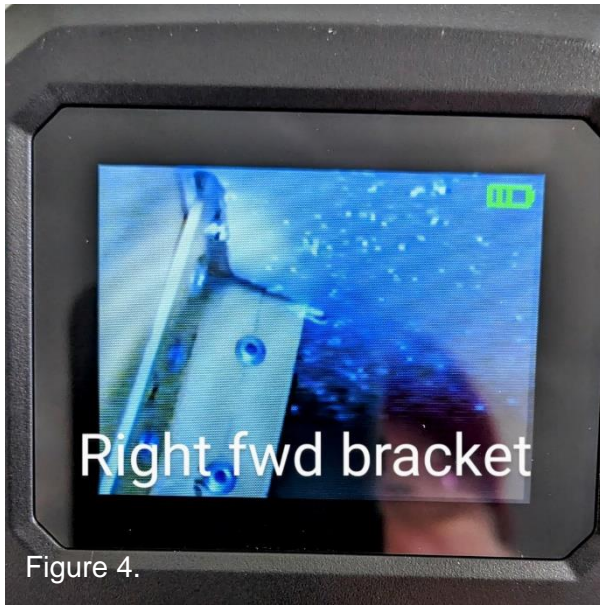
shows the image taken using the inspection camera of the covered portion the bracket. This allows for inspection of the condition of the rivets and cracks in the bracket should be visible if present.
